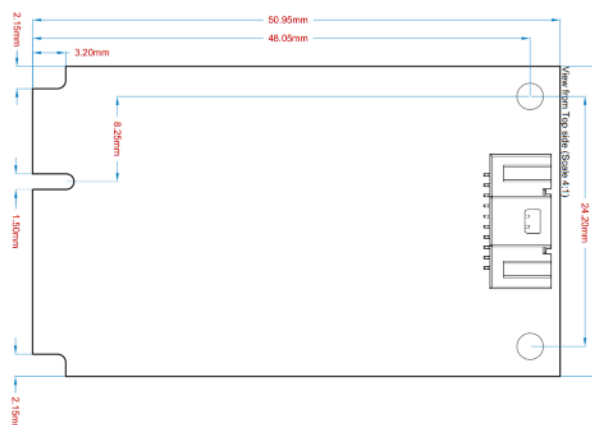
Board Dimensions of DE150100 Aviolinks® mPCIe MIL-STD-1553 Module 2 CH
